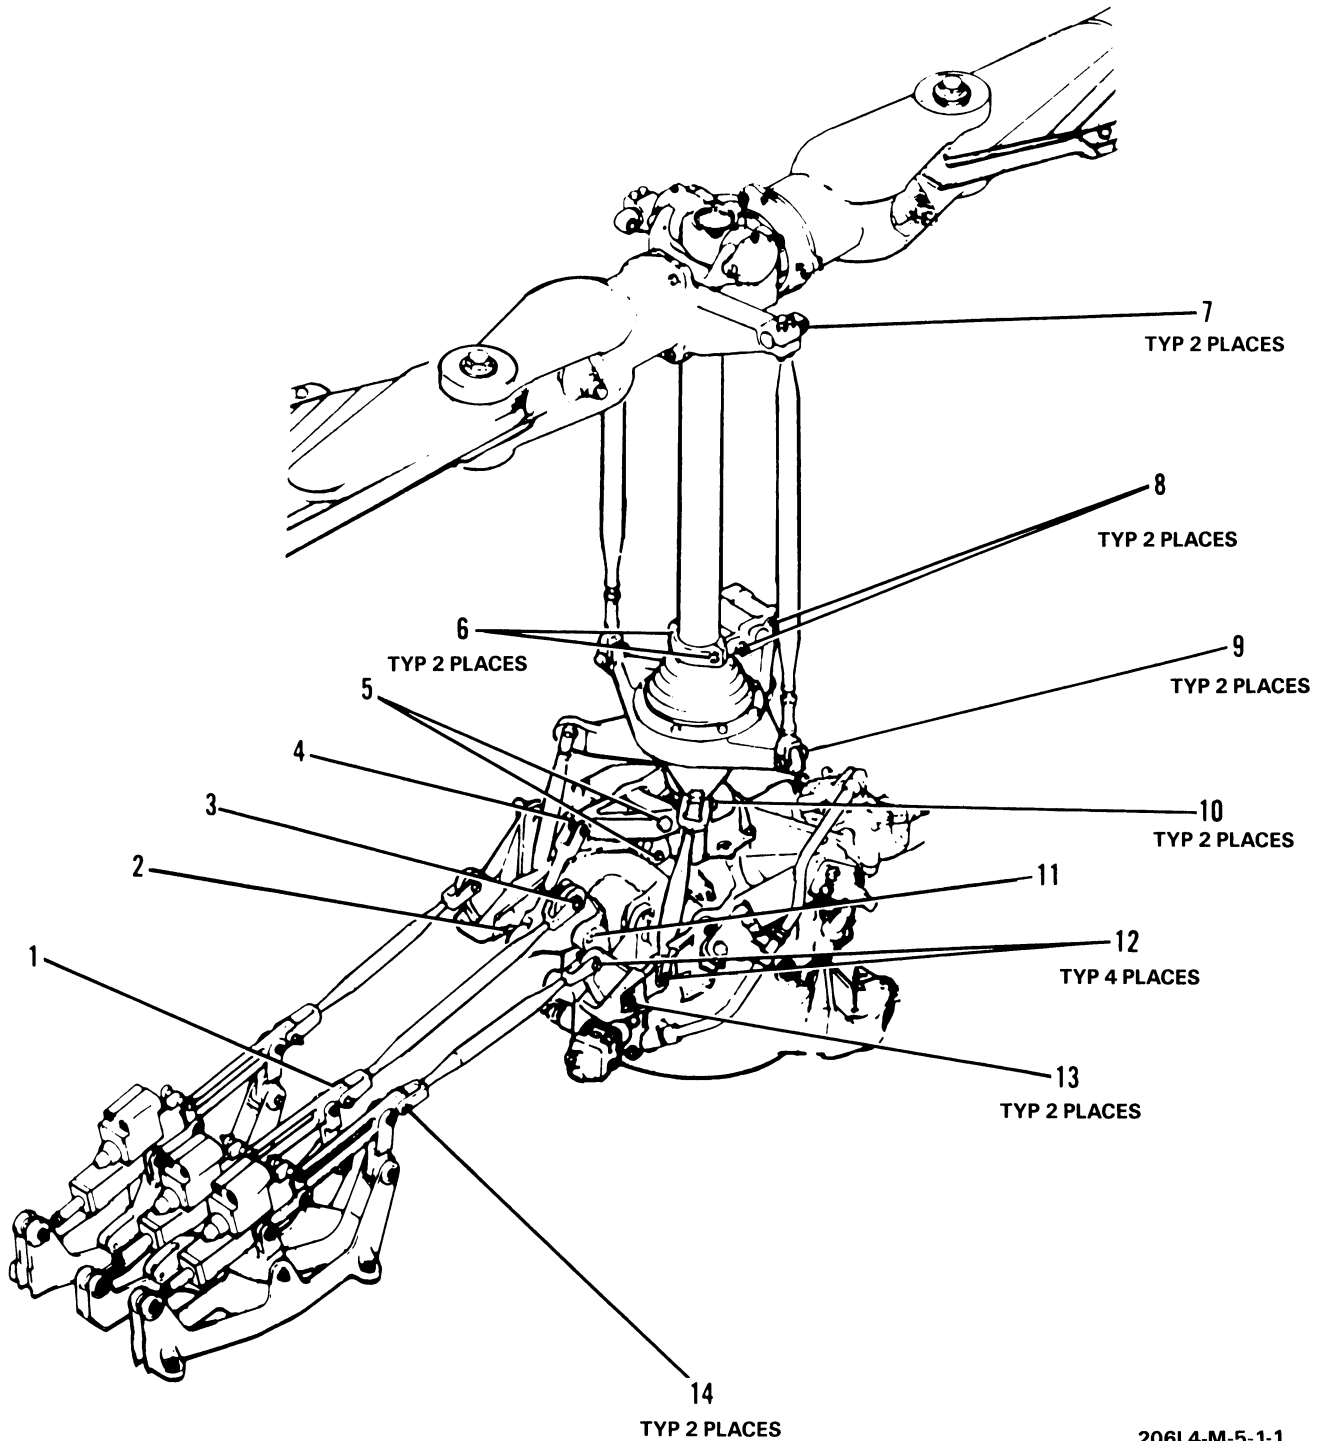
Inspection of Main Rotor Flight Control Bolts/Nuts (Sheet 1 of 2)
